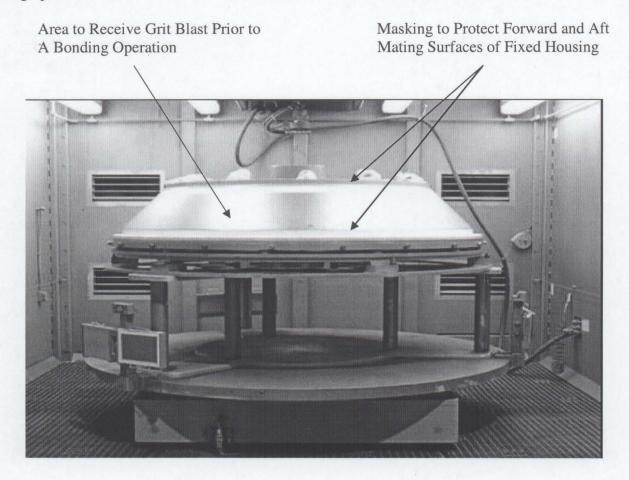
RSRM Nozzle Fixed Housing Masked in Preparation for the Grit Blasting Operation
